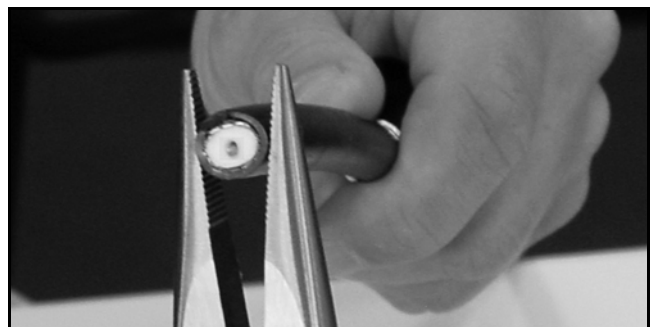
Placing the Heat Shrink Tubing and Ferrule
